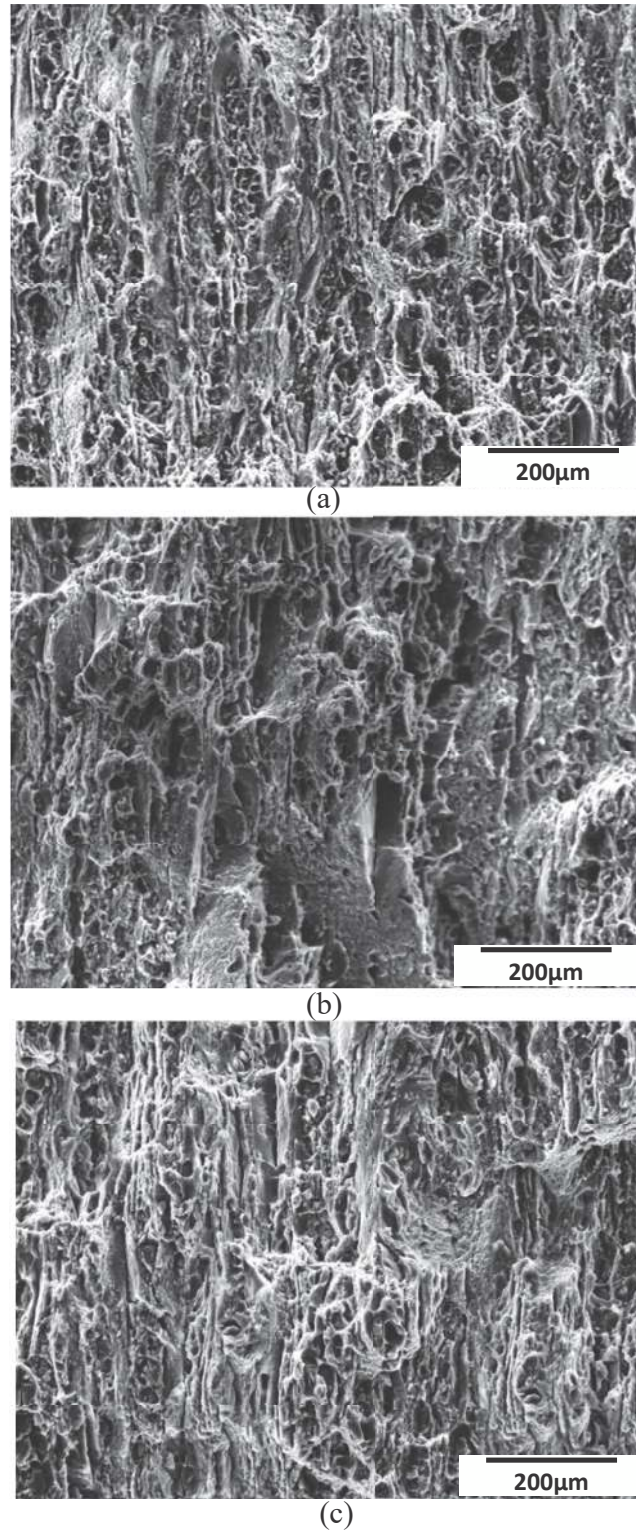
Fractographs of the broken Charpy impact fracture surfaces of different heat-treated plates (a) UA (b) PA and (c) OA.
